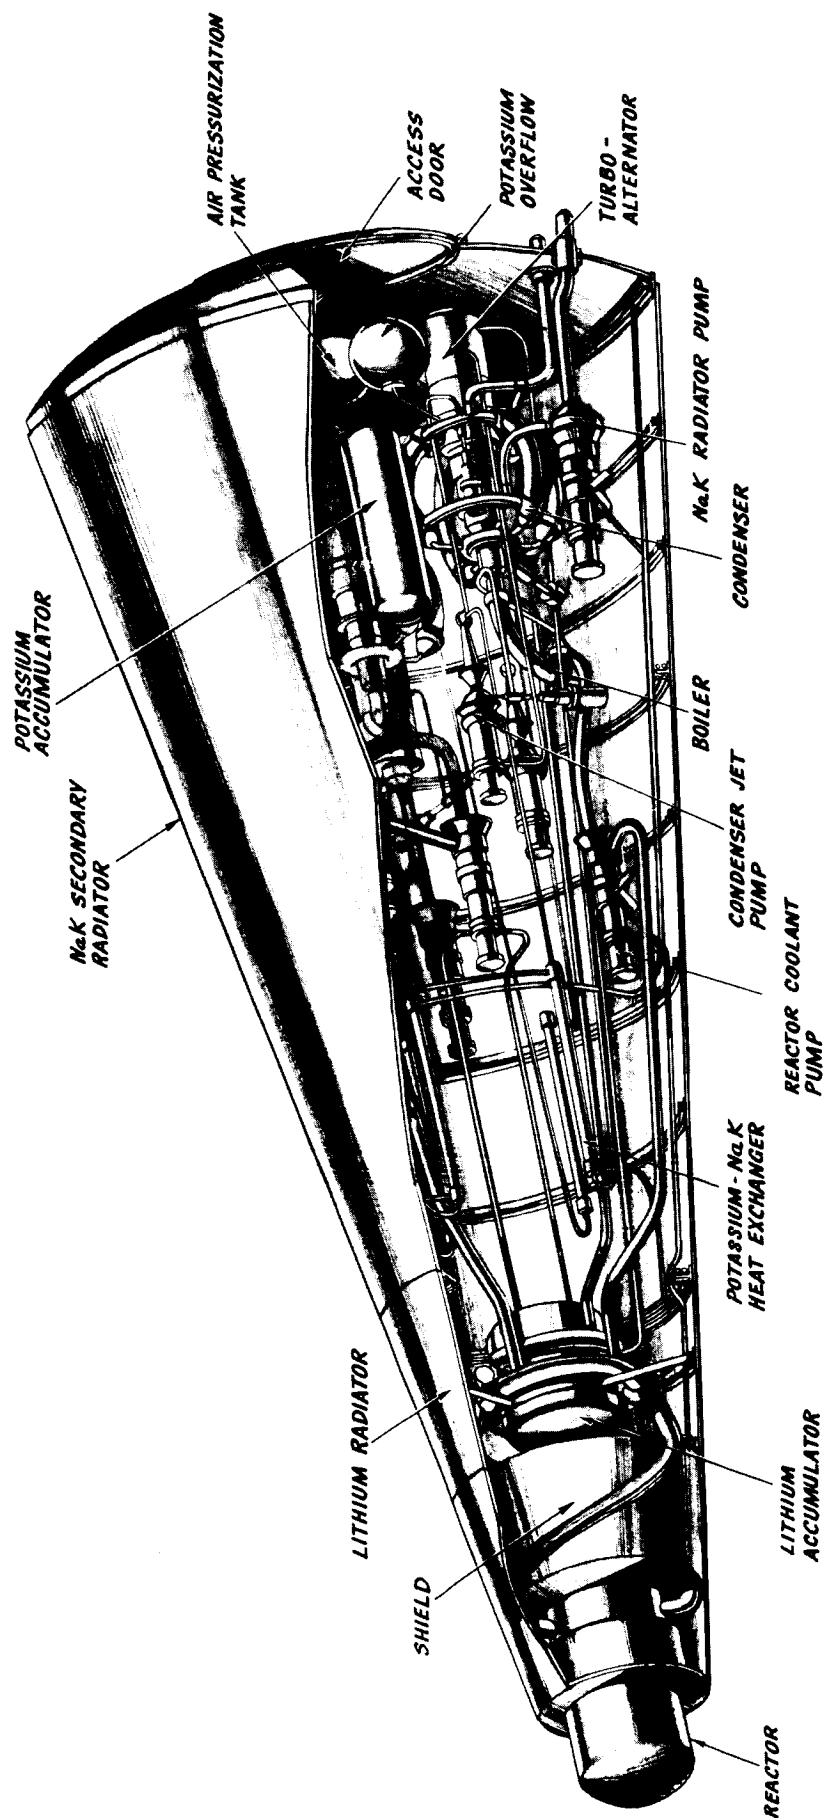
1200 kW_e Power Conversion System Packaging
